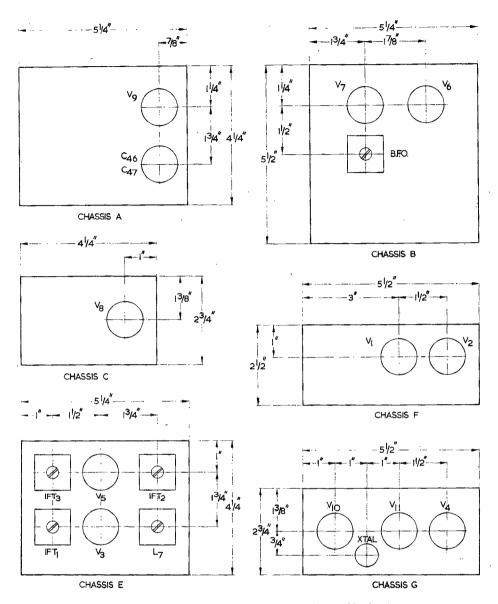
Drilling dimensions of the various sub-assembly chassis
